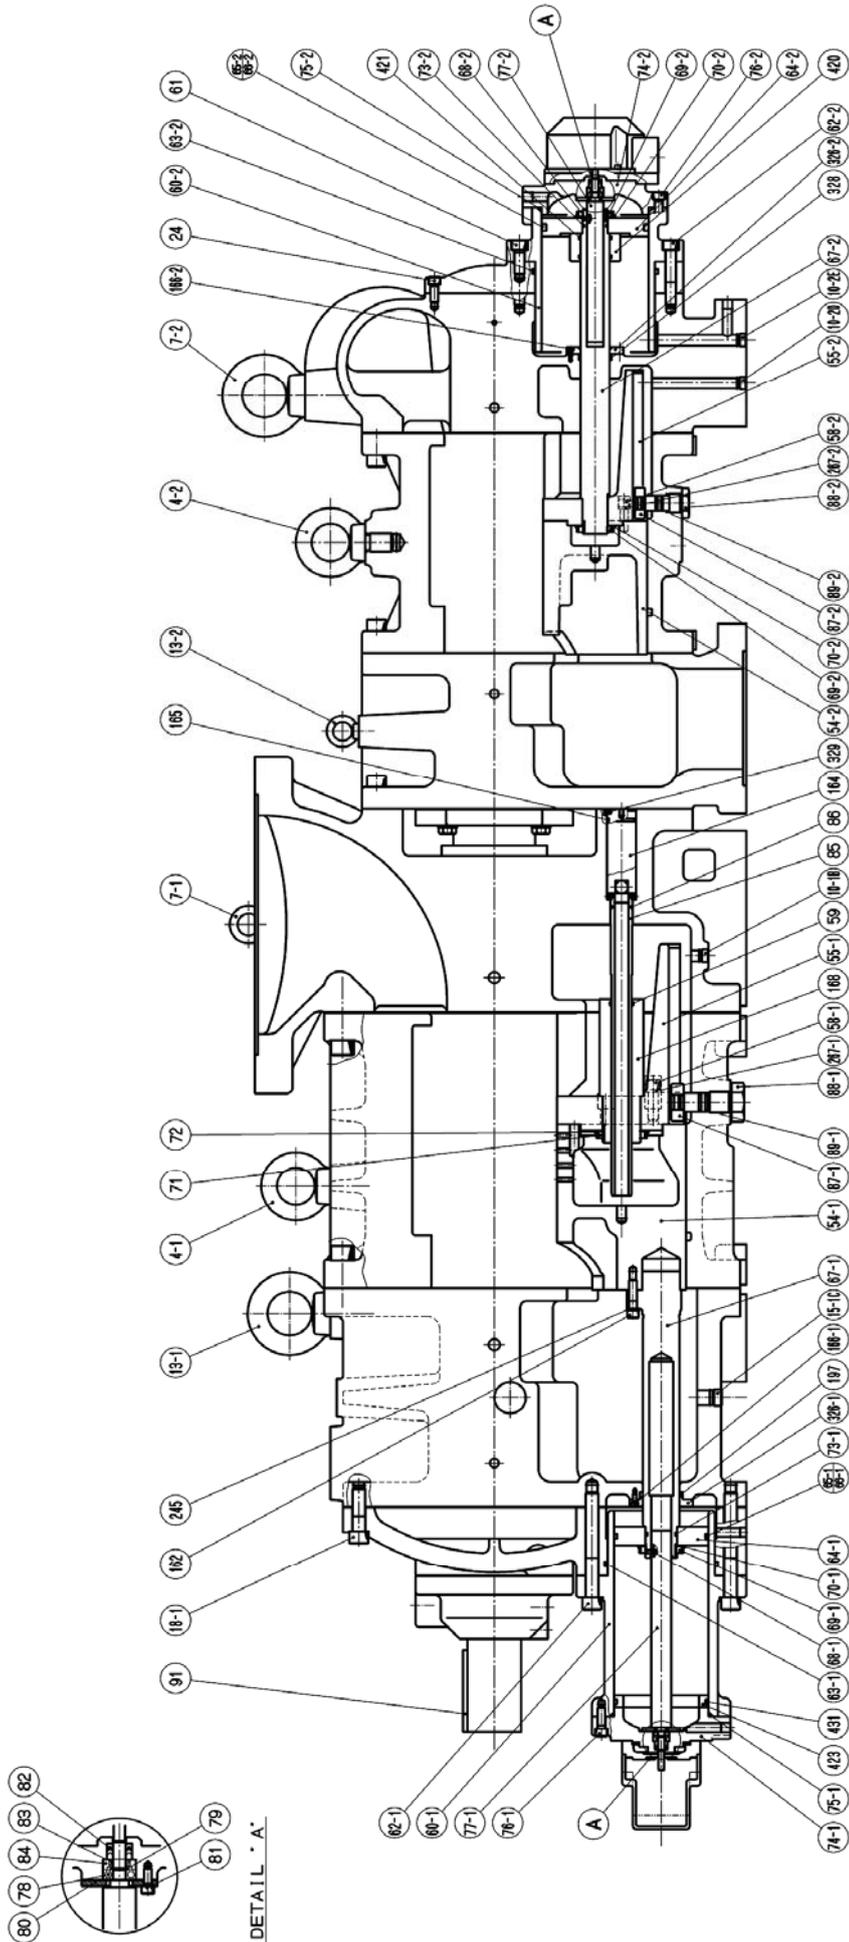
3225MMC Assembly Sectional View (Vertical)
